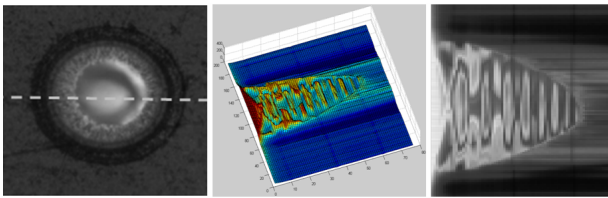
Sequential images of weld pool oscillation after laser pulse off.
